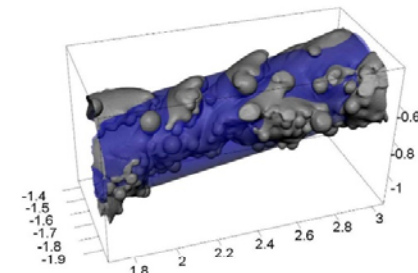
Extracted lattice ROI surface detail showing datum plane
